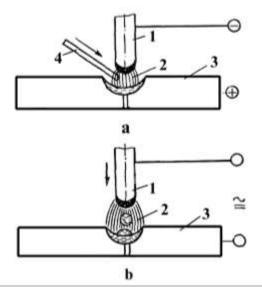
Schemes of the arc welding: a - by N.Benardos; b - by N.Slavjanov; 1 - electrode; 2 - electric arc; 3 - works be welded; 4 - filled metal
